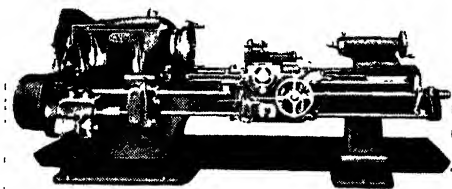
An 8-in. Centre Lathe by Langs of Johnstone for Sliding, Surfacing, and Screw-Cutting.
